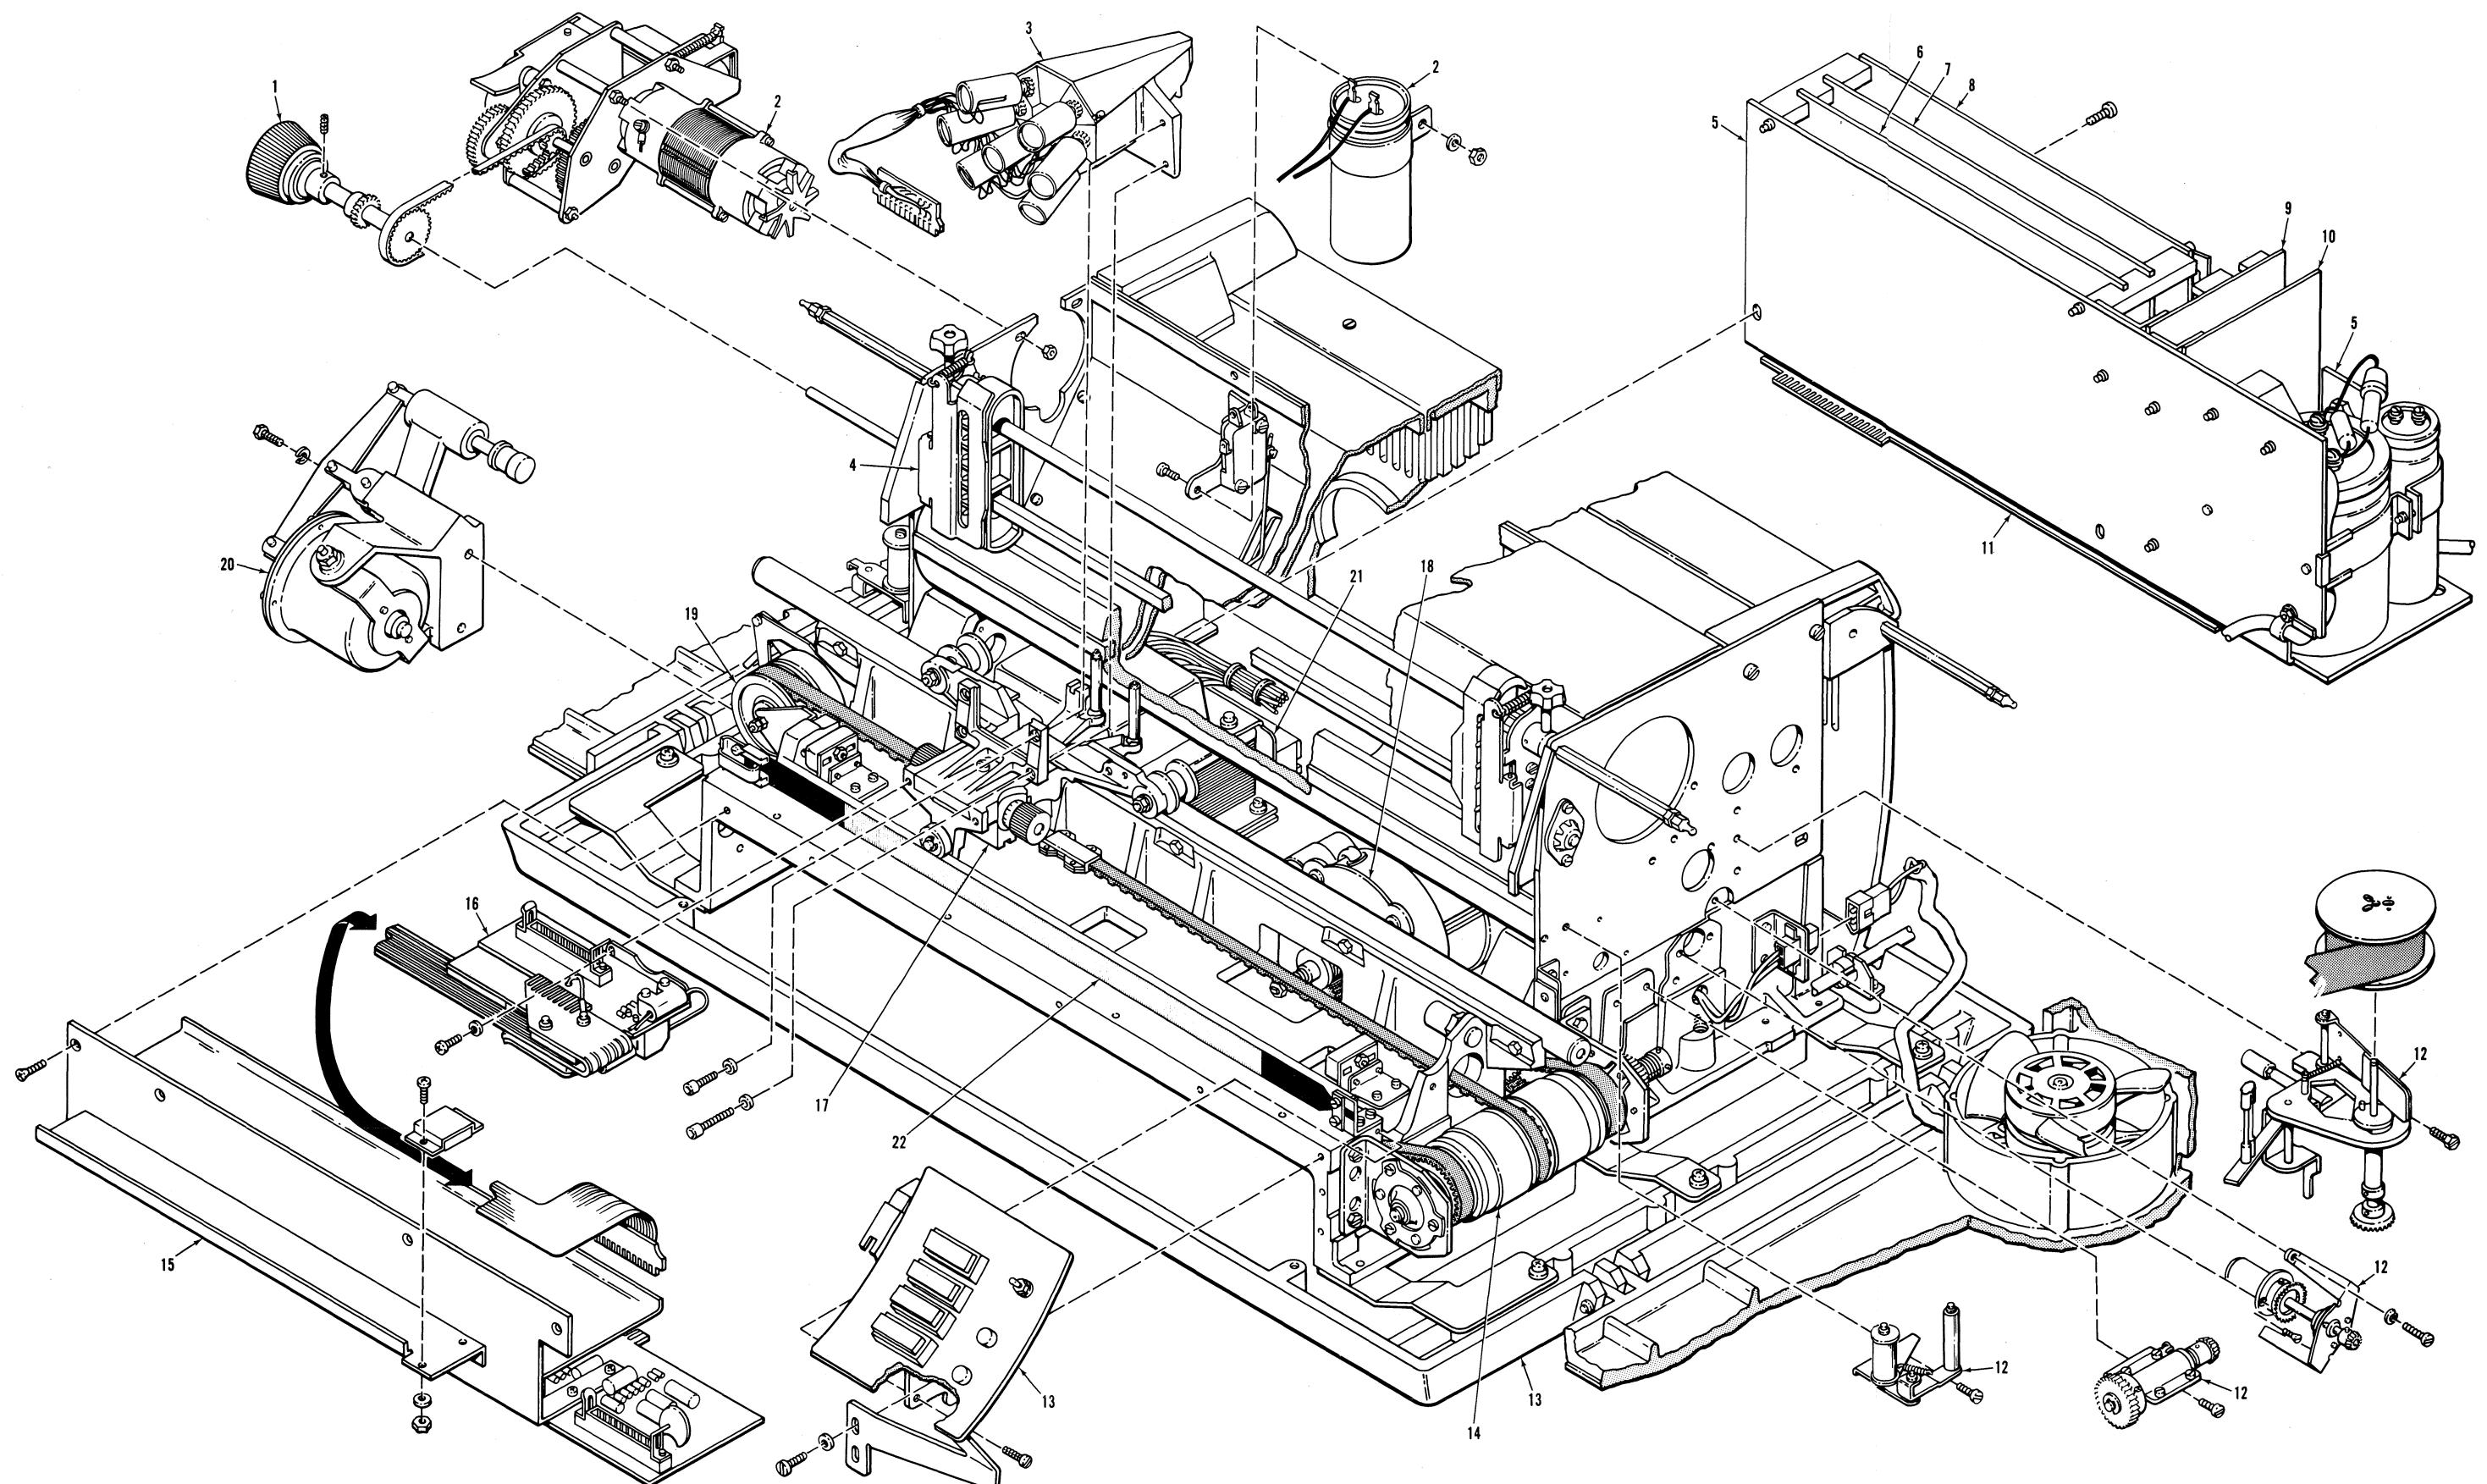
i. MECHANICAL SUBASSEMBLIES,
